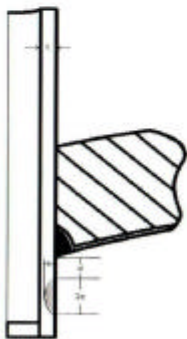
Outside, Axial Surface Flaws, Below the Attachment Weld, Nozzle Uphill Side - Crack Growth Predictions
